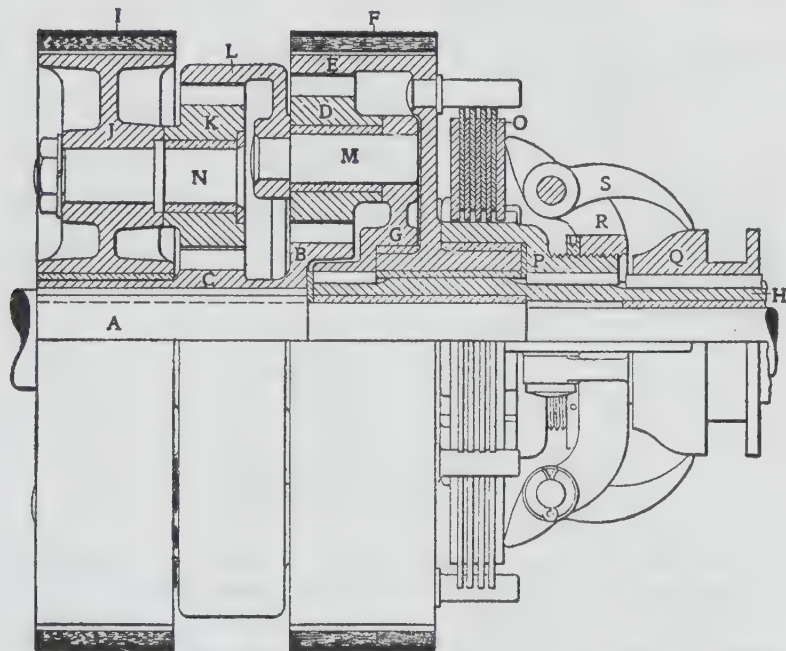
ASSEMBLY OF INTERNAL GEAR TYPE OF PLANETARY GEAR SET.
